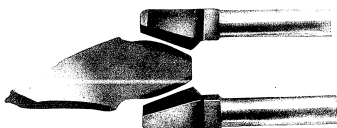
Macro-grinding of hardened tooth and end piece used. Tooth modulus 12.
